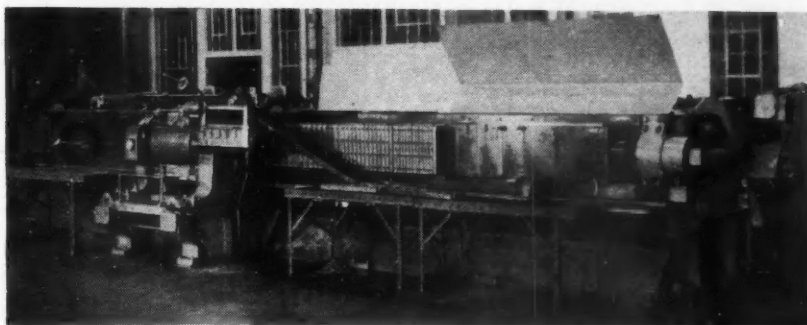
Horizontal machine for broaching the joint face, bolt bosses, and water outlet on heads of a six cylinder automobile engine
